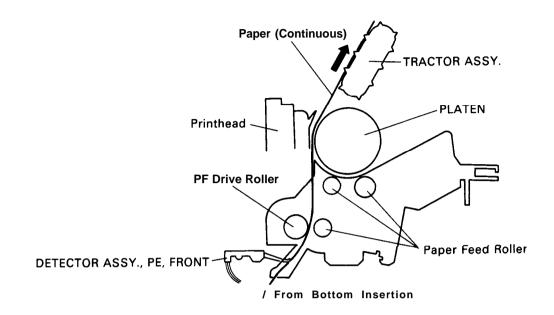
Paper Path for Bottom Entrance Pull Tractor Feed
